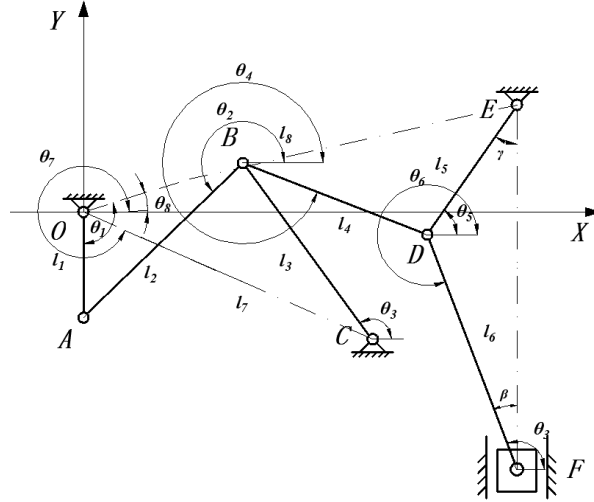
Geometric modeling of crank double toggle linkage mechanism
